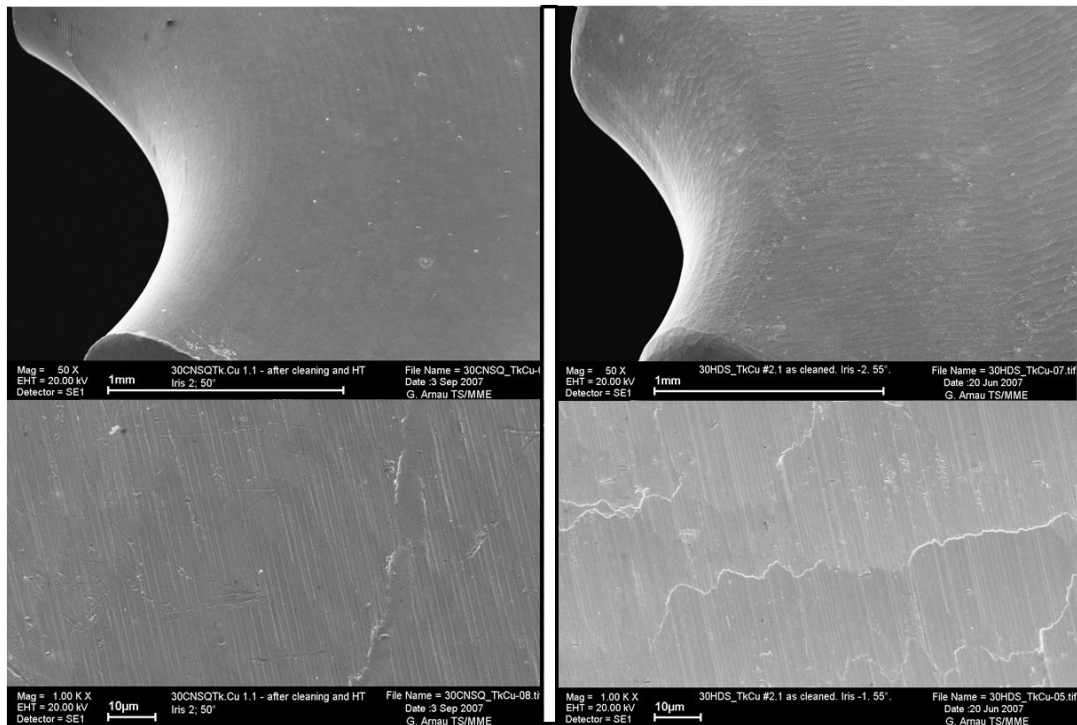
Surfaces machined by a diamond tool on the left and by a WC tool on the right (SEM micrographs by G. Arnau, courtesy of CERN).
